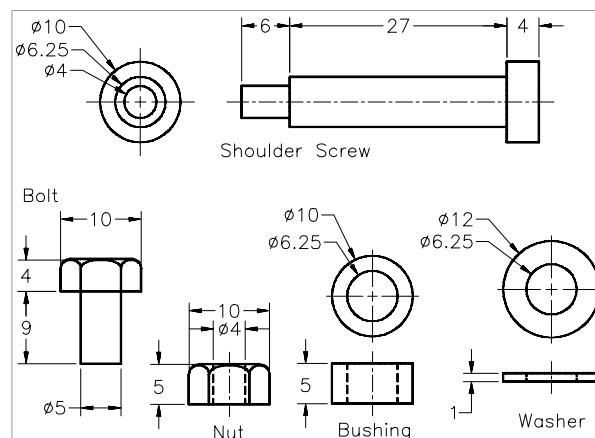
Dimensions of the Shoulder Screw, Bolt, Nut, Bushing, and Washer
